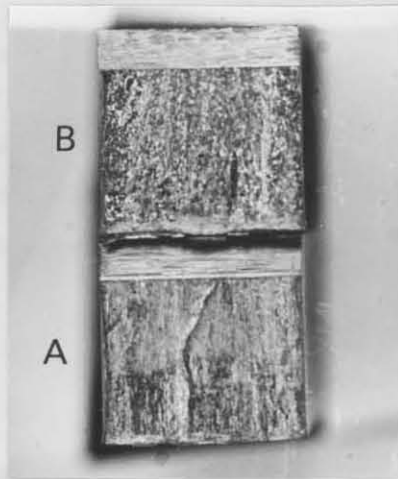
Through-thickness Charpy fracture surfaces of 3CR12.
